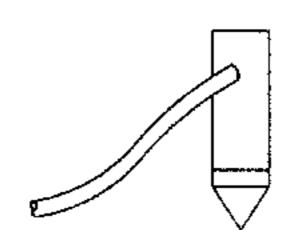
is an exploded side elevational view of the embodiment disclosed in FIGS. 1–3, showing the configuration of the base portion.
